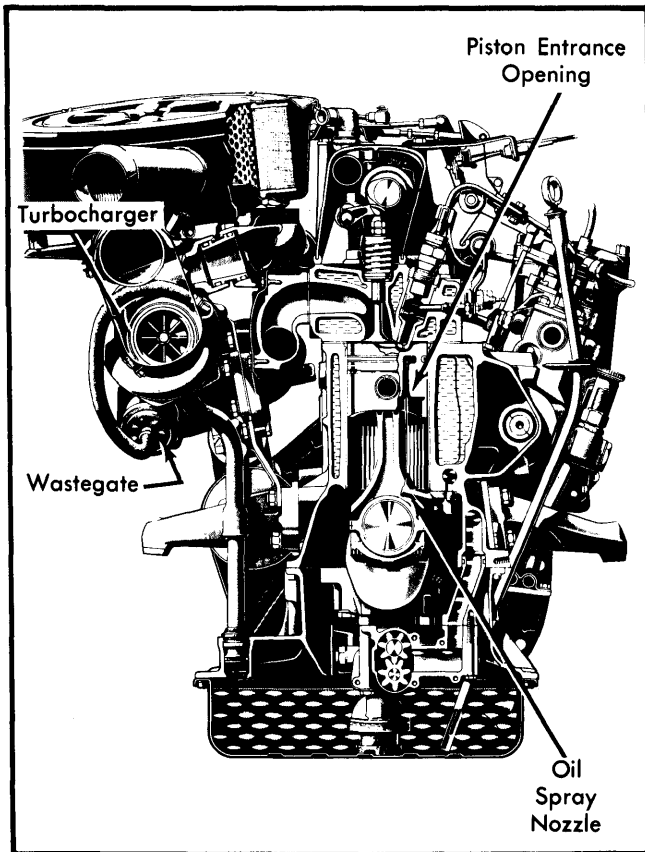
Cutaway View of Mercedes 300 SD Turbocharged Engine
